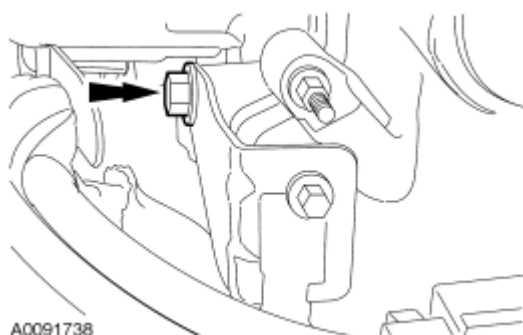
Locating Radio Interference Capacitor Bracket Bolt
